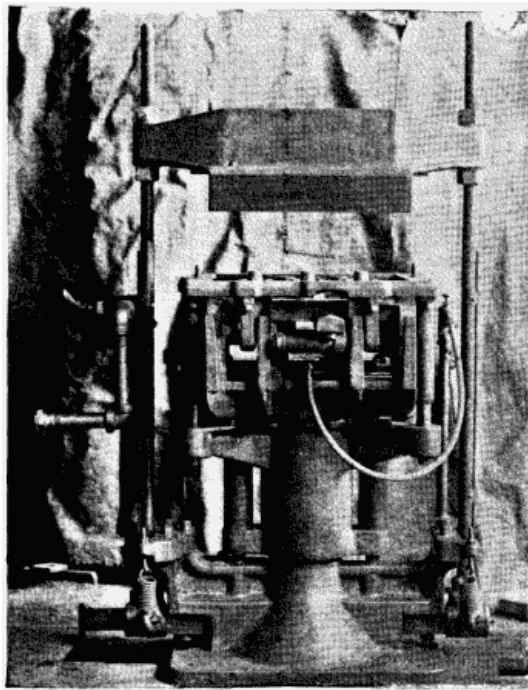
POWER DRIVEN VIBRATOR MACHINE.
